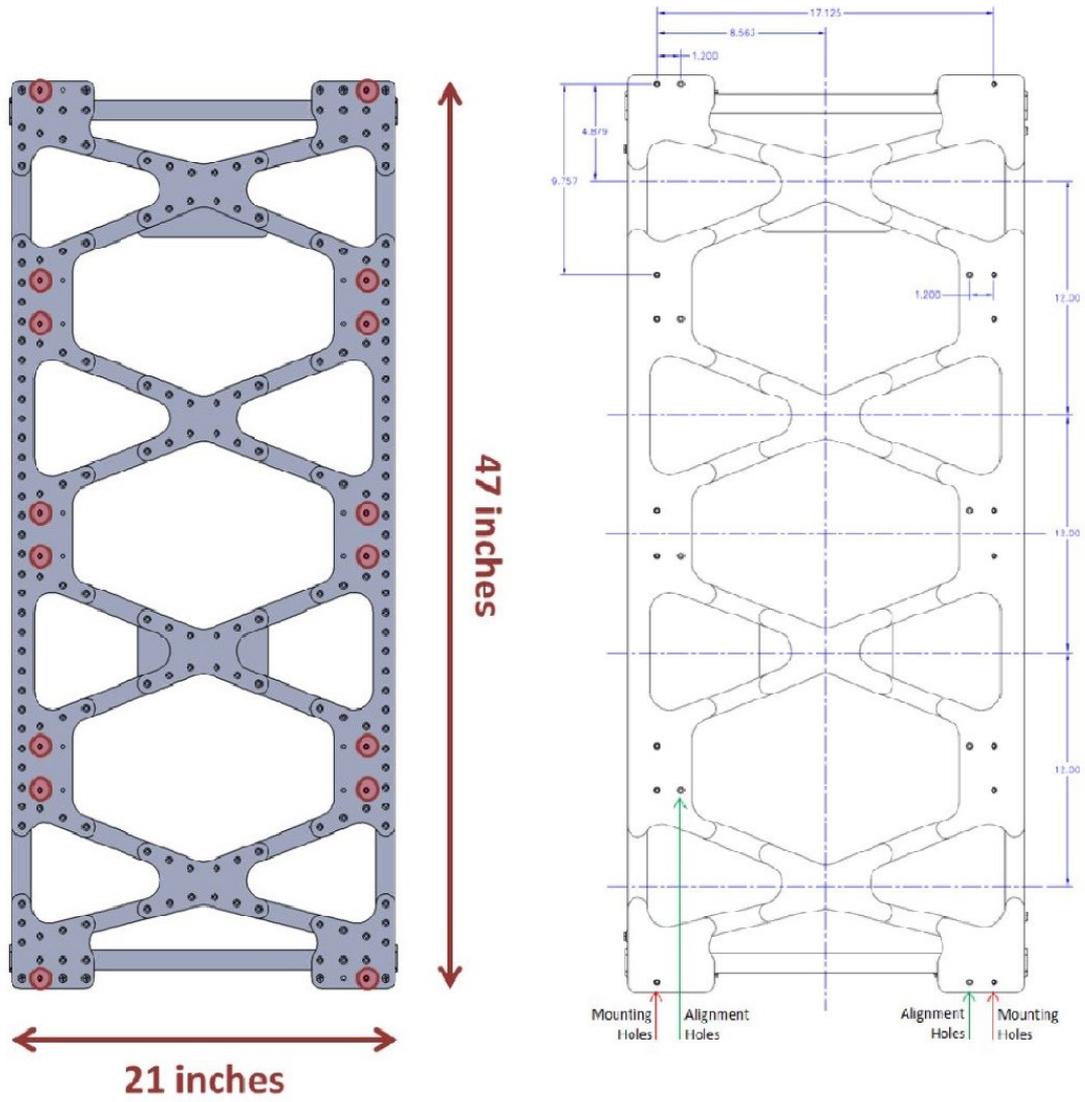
SpaceShipTwo standard mounting plate with dimensions. [2.23]
